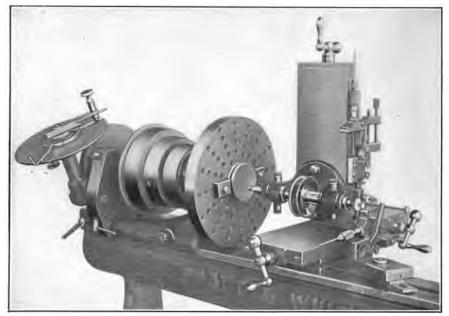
LOCATING HOLES WITH THE MICROMETER DEPTH GAGE
